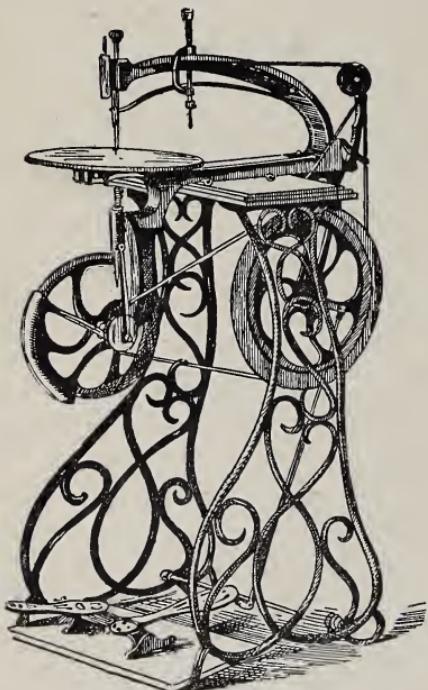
THE CHALLENGE TREADLE MACHINE.
